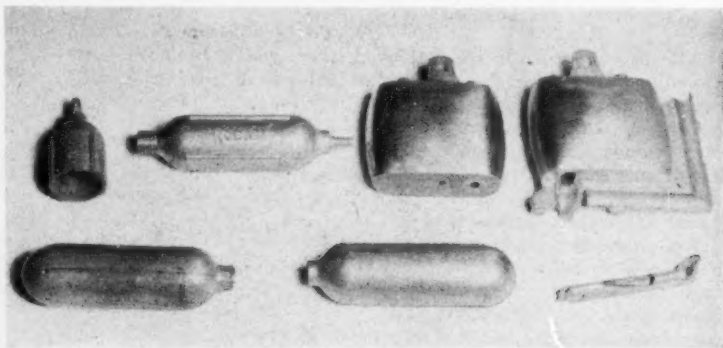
Further Examples of Coreless Hollow Pressure Die Castings Include these Butane Gas Cigarette Lighter Bottles and Lighter Bodies. Improved Surfaces for Plating are Obtained by the Application of a Vacuum to the Body Die Before the Metal is Injected
